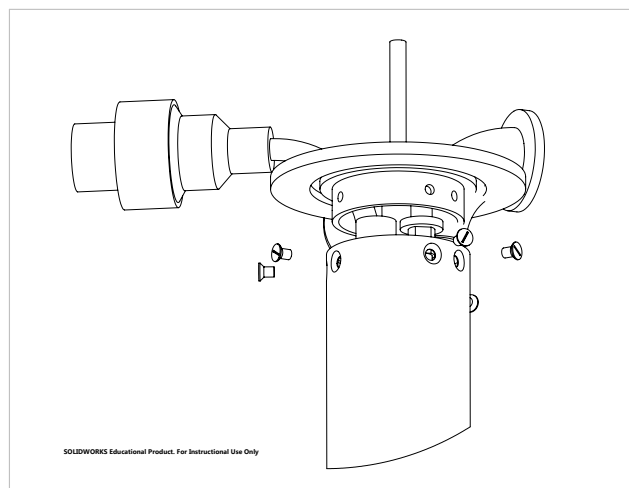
In this view, components are exploded to show how the insert is assembled. The CFT fits over a lip on the upper flange. Sunken M3-sized machine screws are connected through the holes on the CFT to the threaded holes of the upper flange, securing both components in place.
